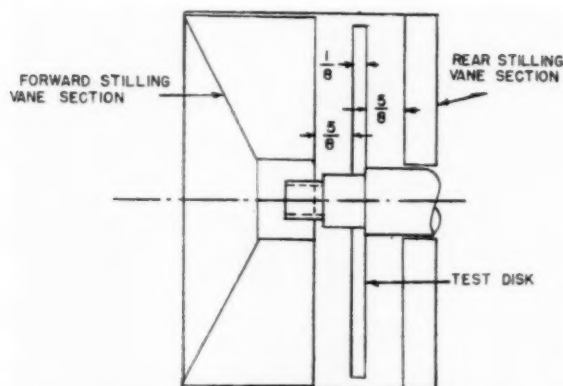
Clearances between test disk and stilling vanes of rotating-disk apparatus
